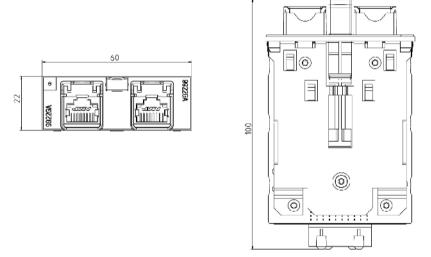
MM900 dimension drawing 1: Electrical RJ-45 ports with securing collar
